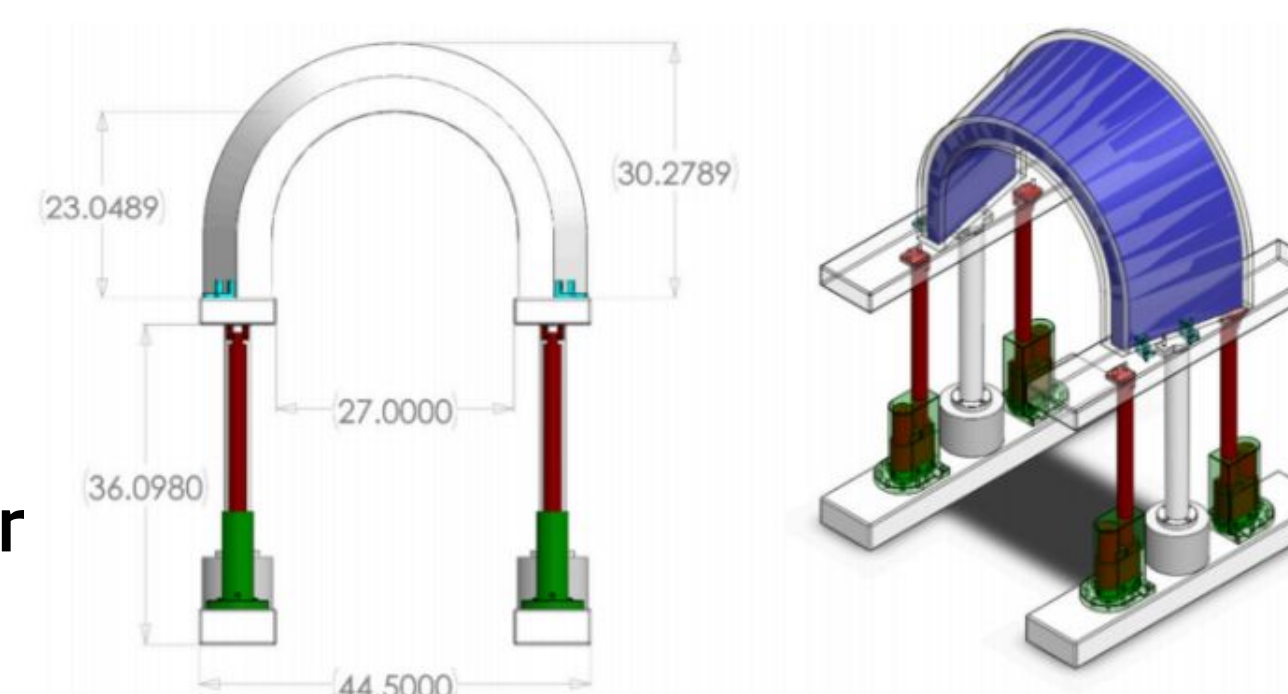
"High-Waisted Skirt" shield design with support assembly.
